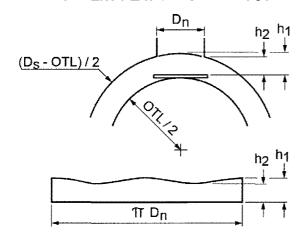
IMPINGEMENT PLATE – PARTIAL LAYOUT
